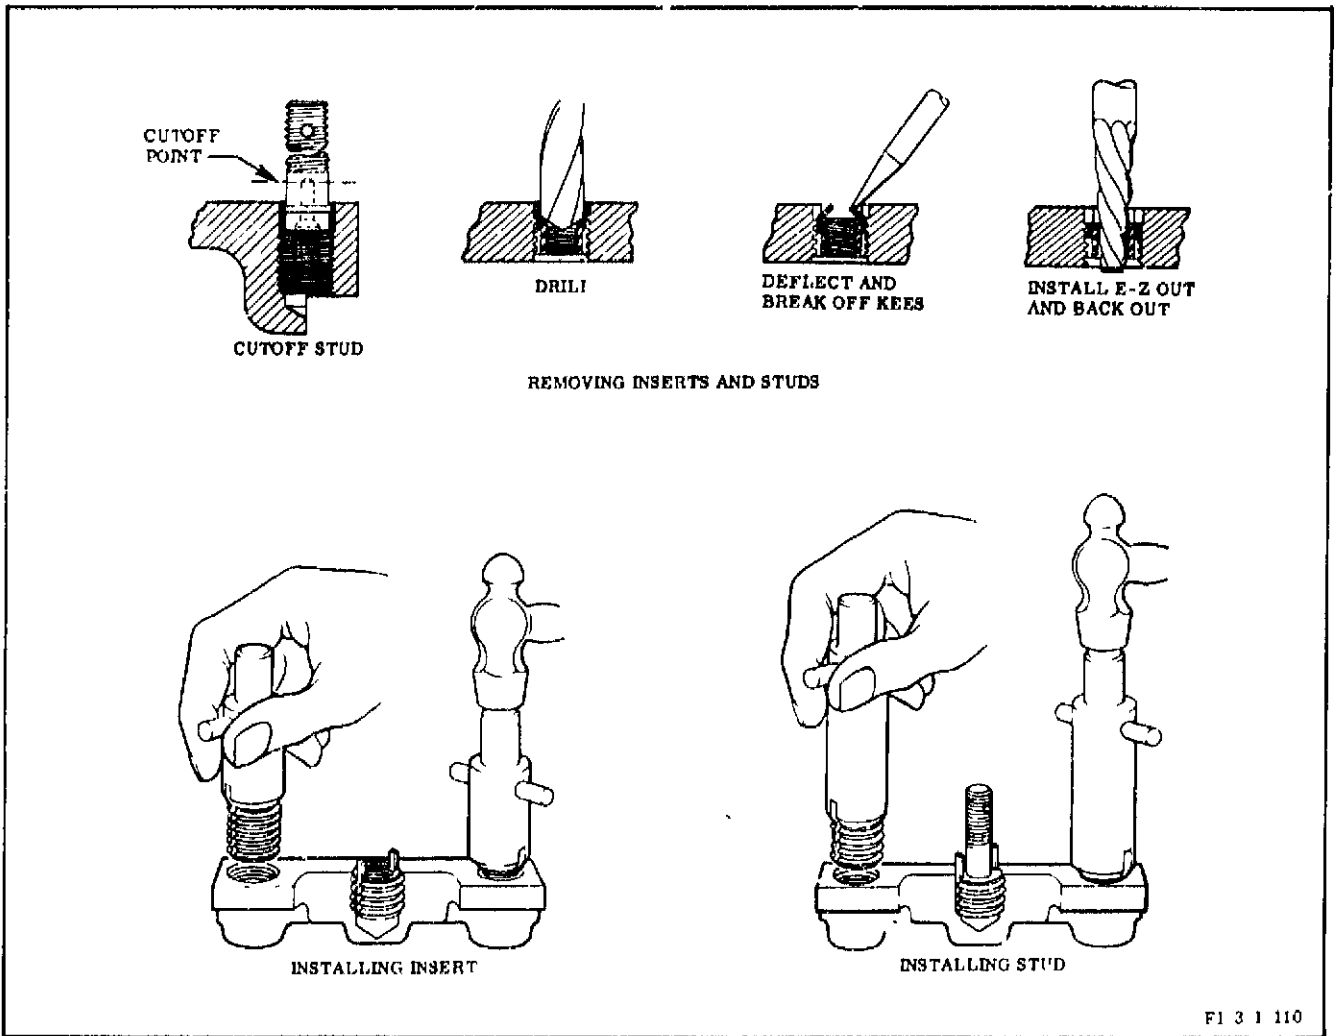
Removing and Installing Keenserts Inserts and Studs
